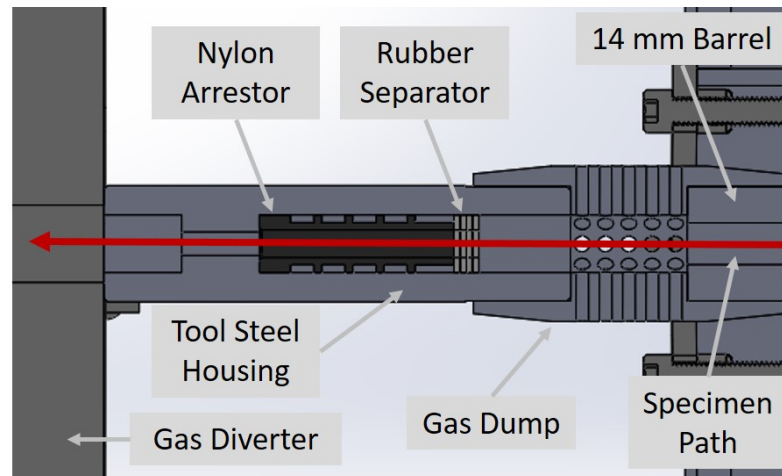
Overview of sabot stripping assembly. The specimen flight path and primary components are labeled.
